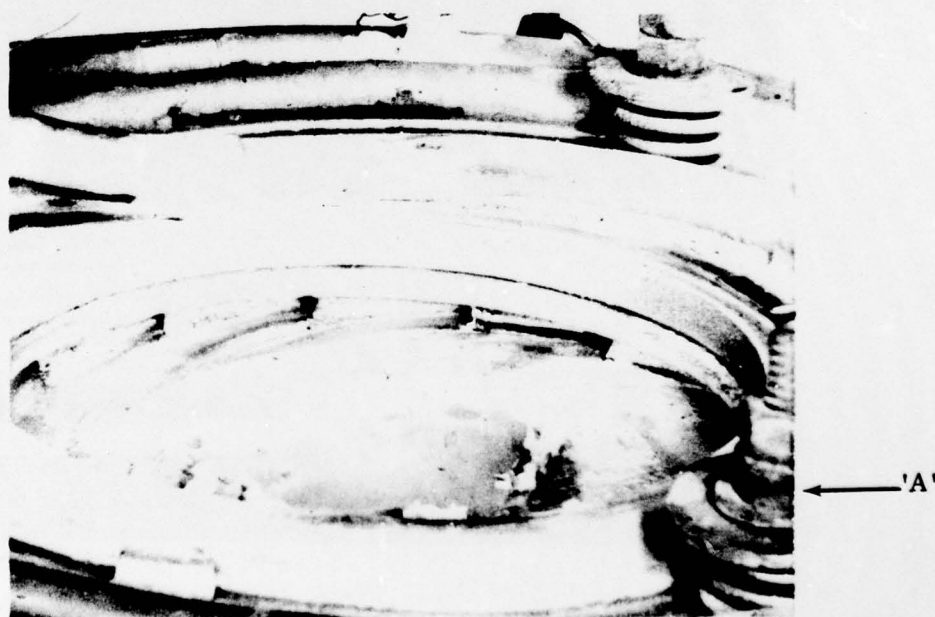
B. Second View of Nozzle (Spring 'A' is Shown in Bottom Right of Picture)
